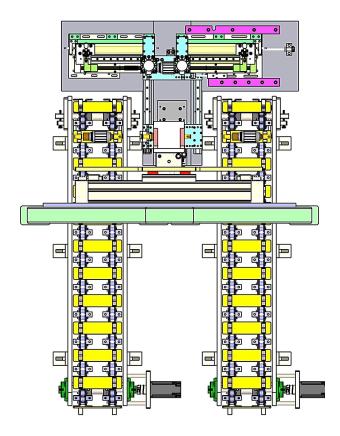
Three dimensional design diagram of motor rotor snap ring automatic press fitting machine
